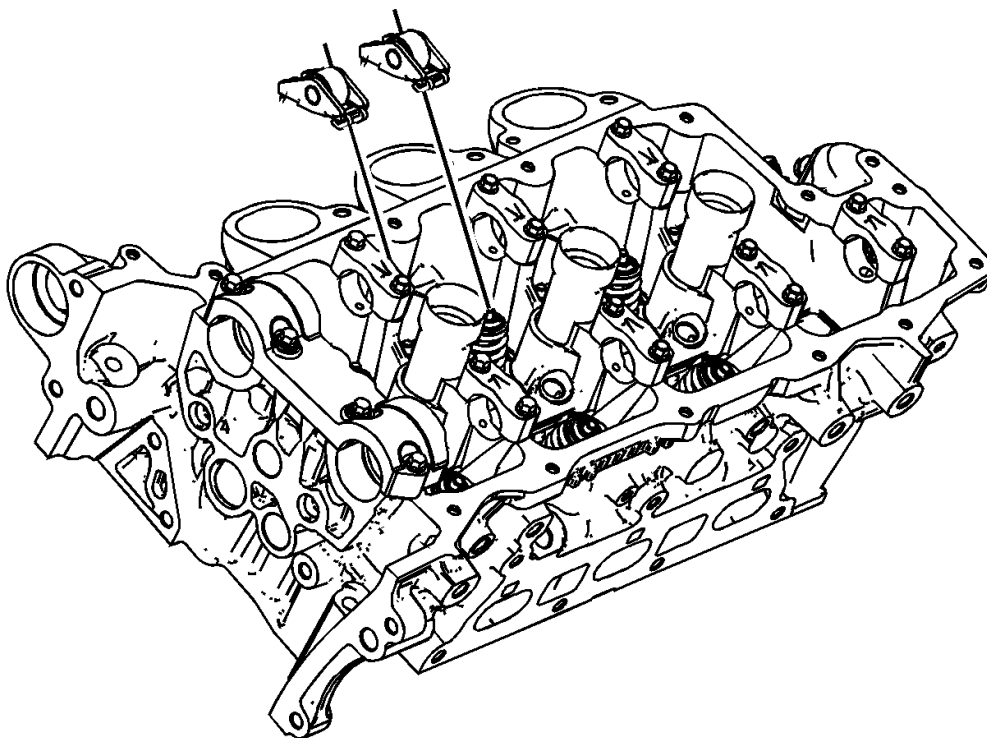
View Of Valve Rocker Arm - Left Side (LLT)
